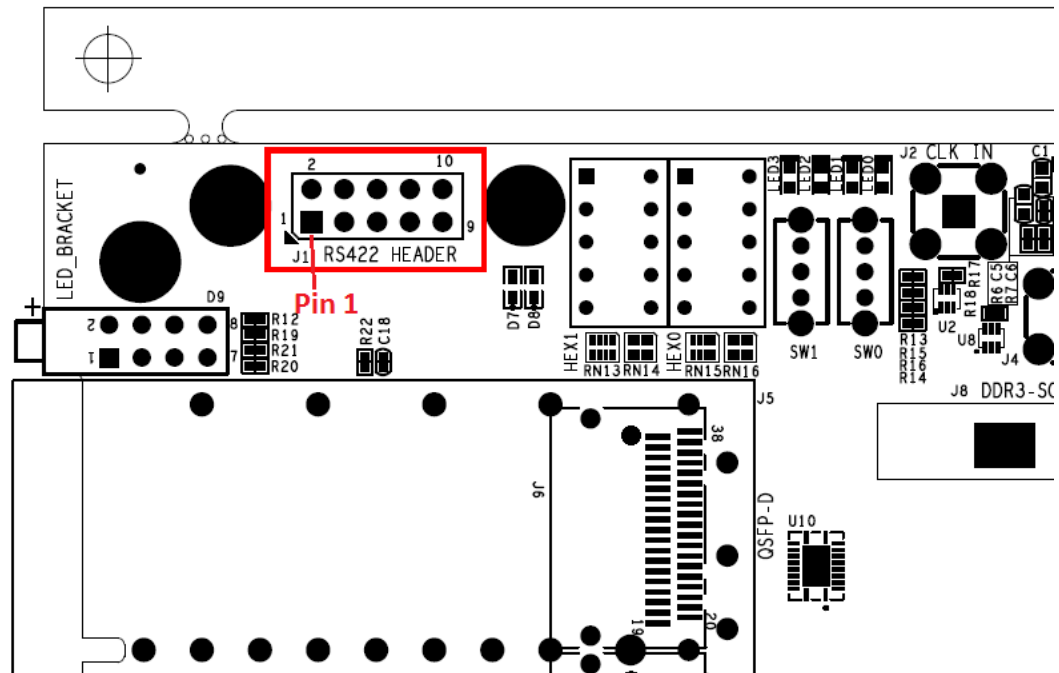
Location of RS422 header (J1) on DE5a-Net board
